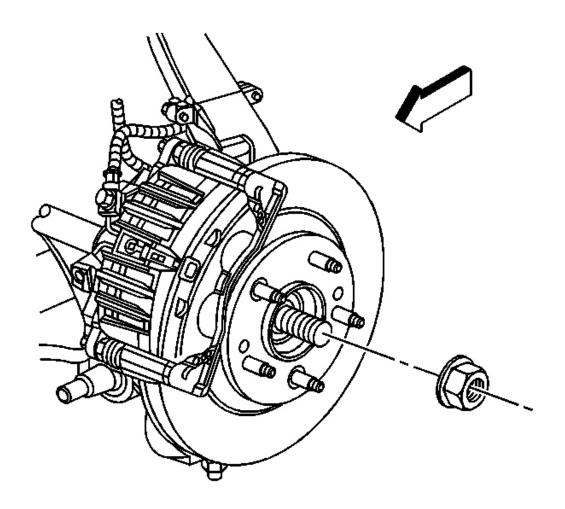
Removing/Installing Wheel Drive Shaft Nut Courtesy of GENERAL MOTORS CORP.
